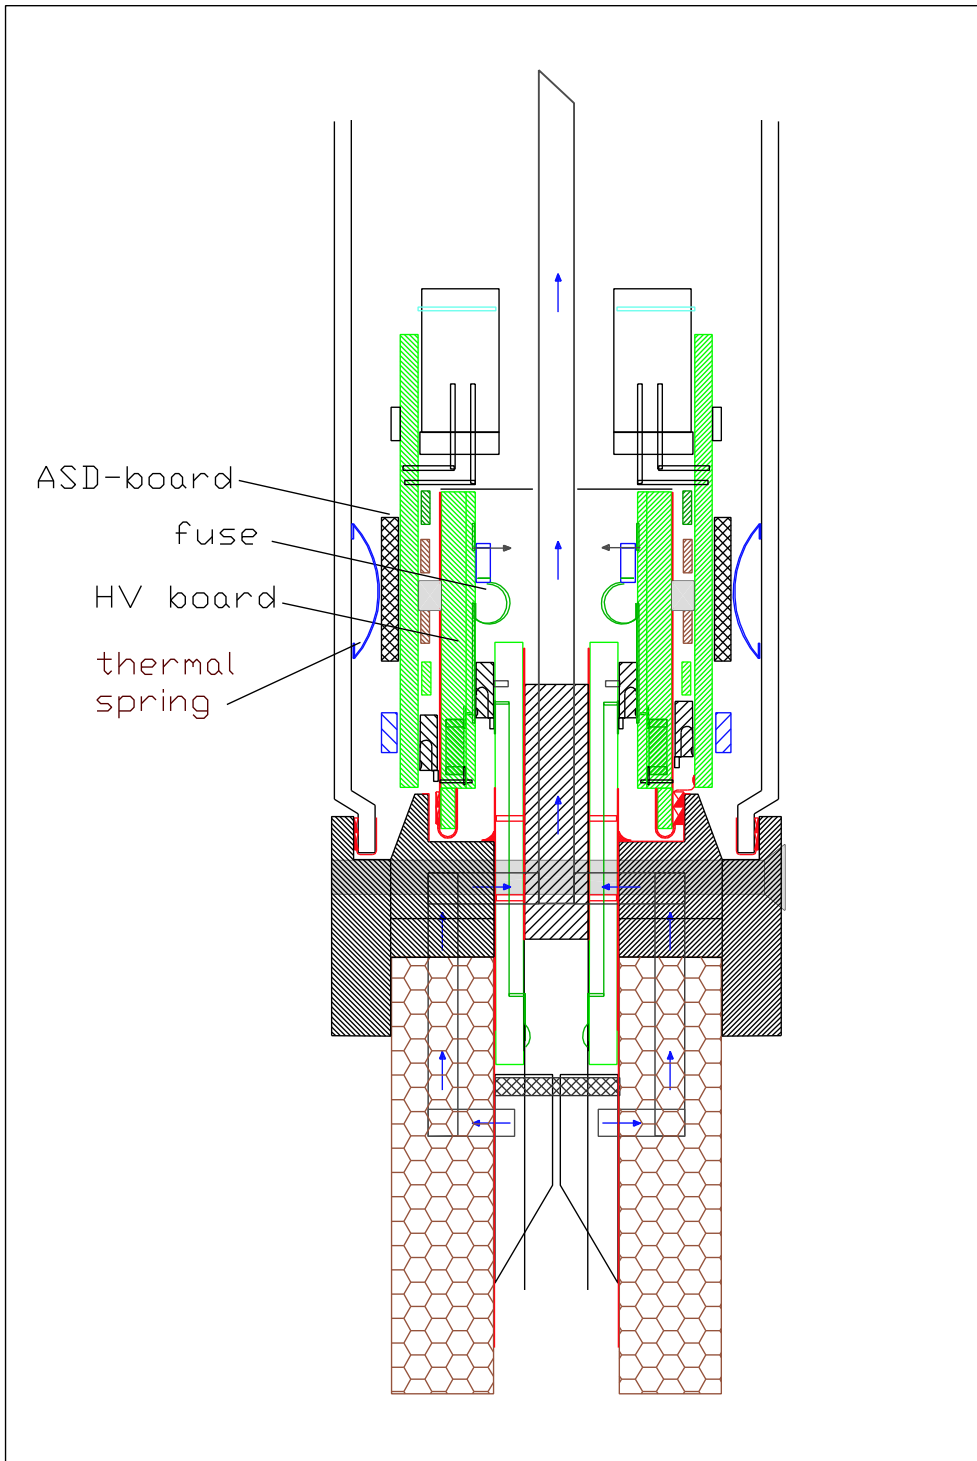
Side view of end piece and mounting of front end boards in T6 – T9.
